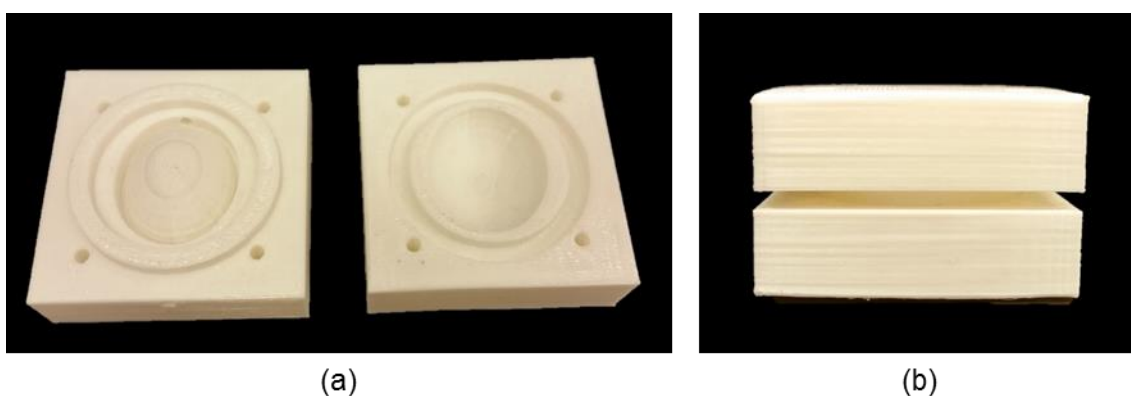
(a) 3D-printed lower (left hand side) and upper (right hand side) parts of the customised dissolution cell prototype and (b) both parts when put together.
